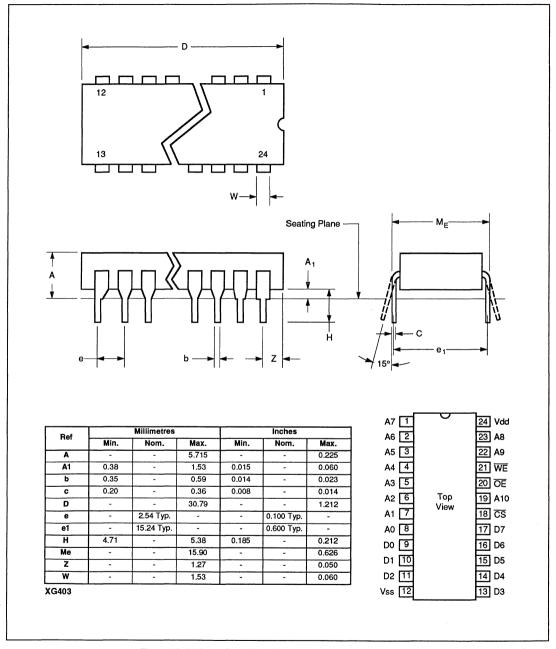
24-Lead Ceramic DIL (Solder Seal) - Package Style C
